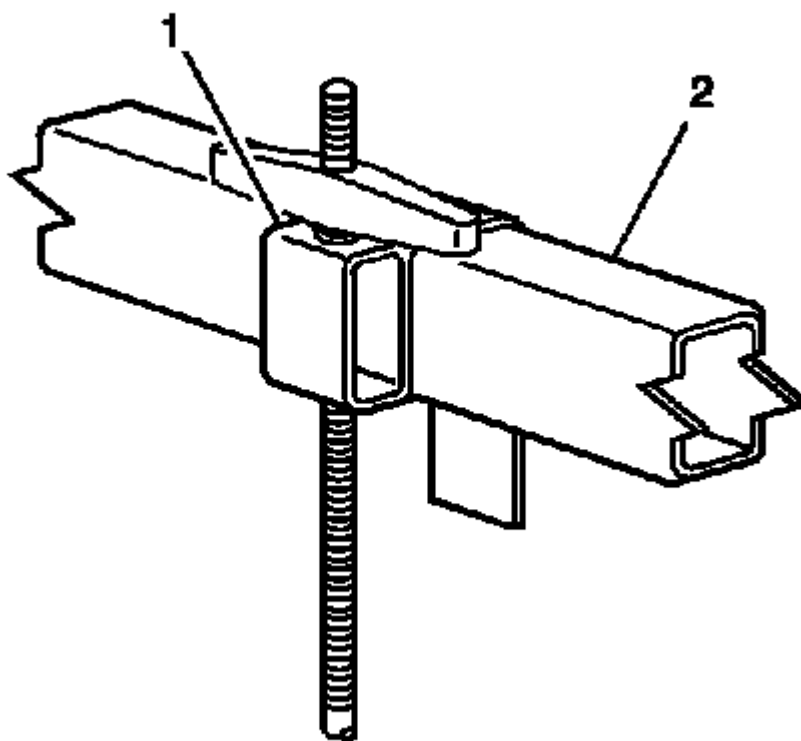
View Of Lift Hook & radiator shelf tube Assembly
